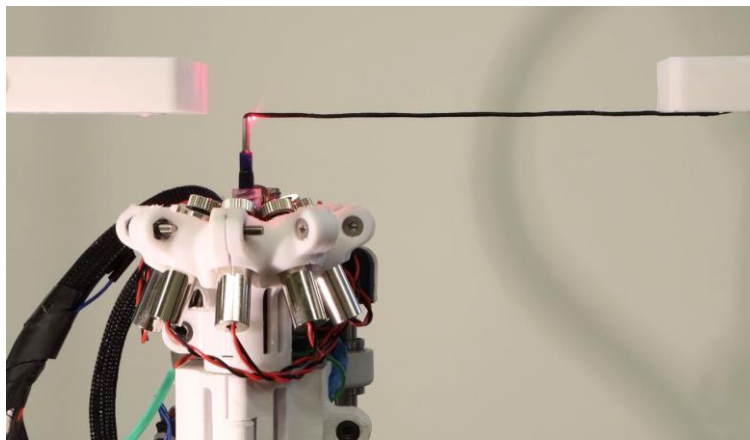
Upside down, single-line bridge print between two PLA blocks.
